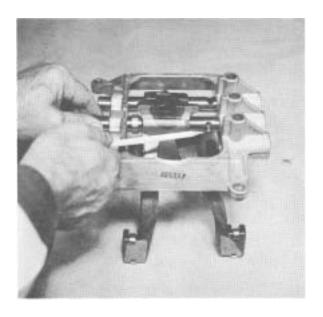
Install 2nd & 3rd shift rod through shift support. Install over shift spacer, shift fork and interlock cross pin.
